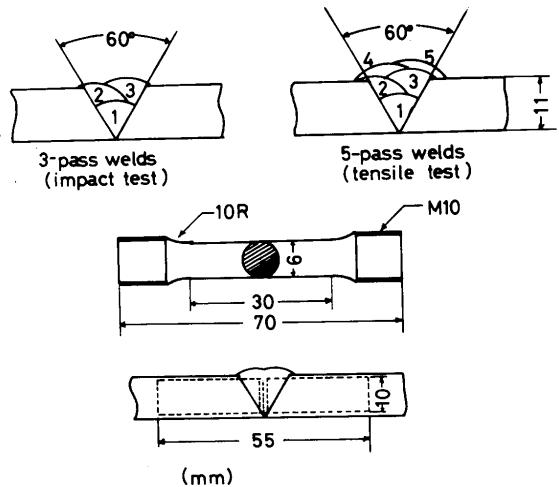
Location of tensile and charpy impact test specimen(mm)
